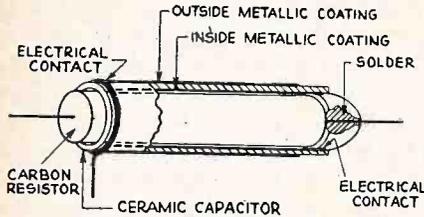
Enlarged isometric cross-section of the R12-C13 unit.
